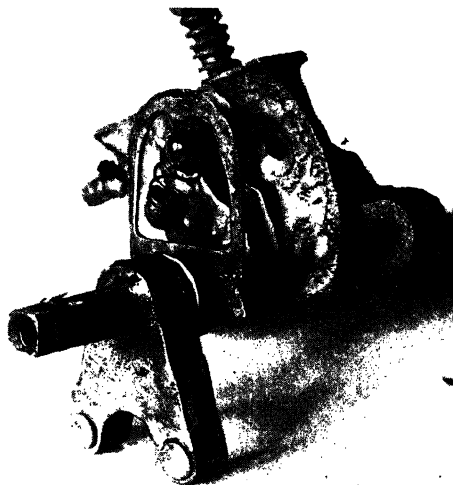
VALVE MECHANISM OF LUCAS WIPER
